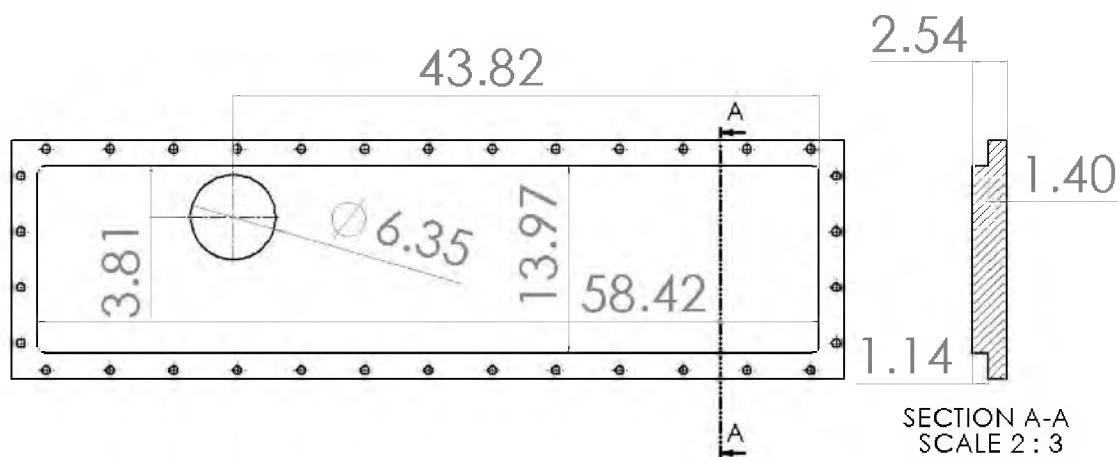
SolidWorks drawing of the removable piece designed to fit into the part of the test section depicted in Figure 3.3.
